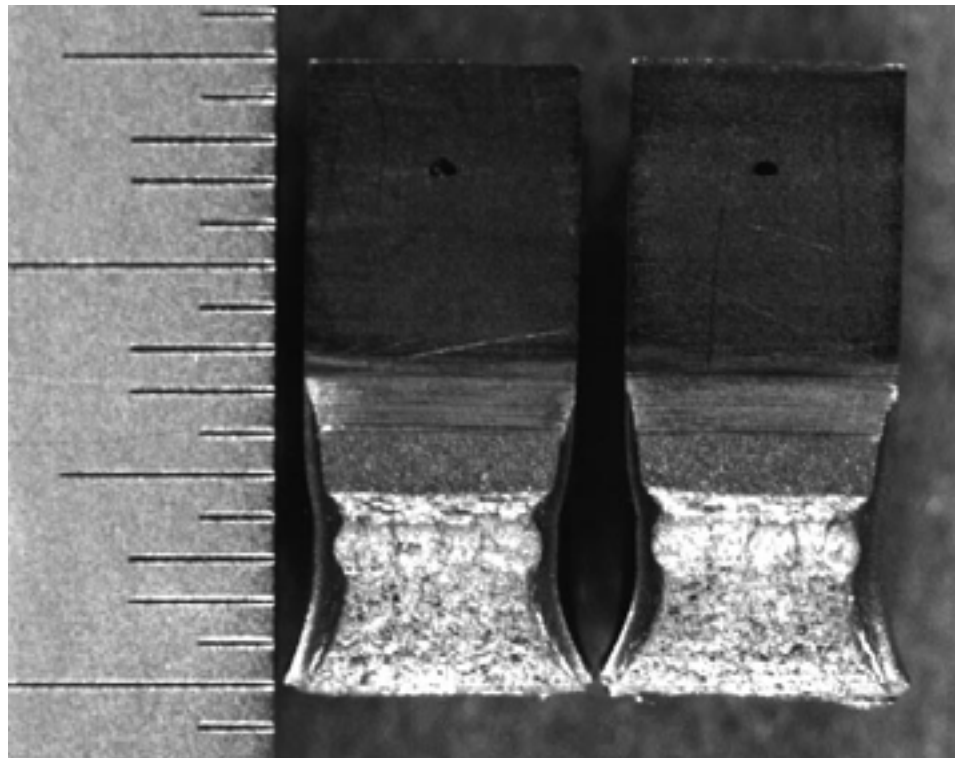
Fracture surface of specimen C16-C tested at 288°C
